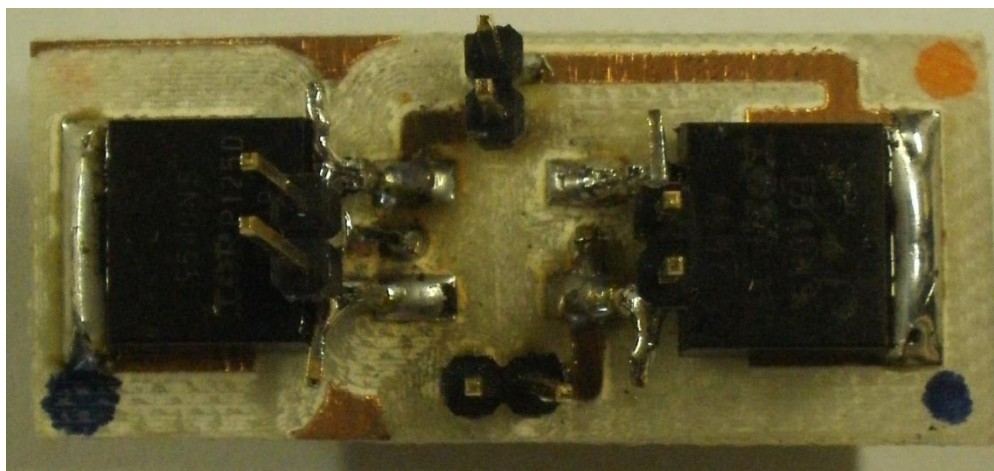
Top view of Device Under Test 4 PCB (Geometrically Symmetrical)
